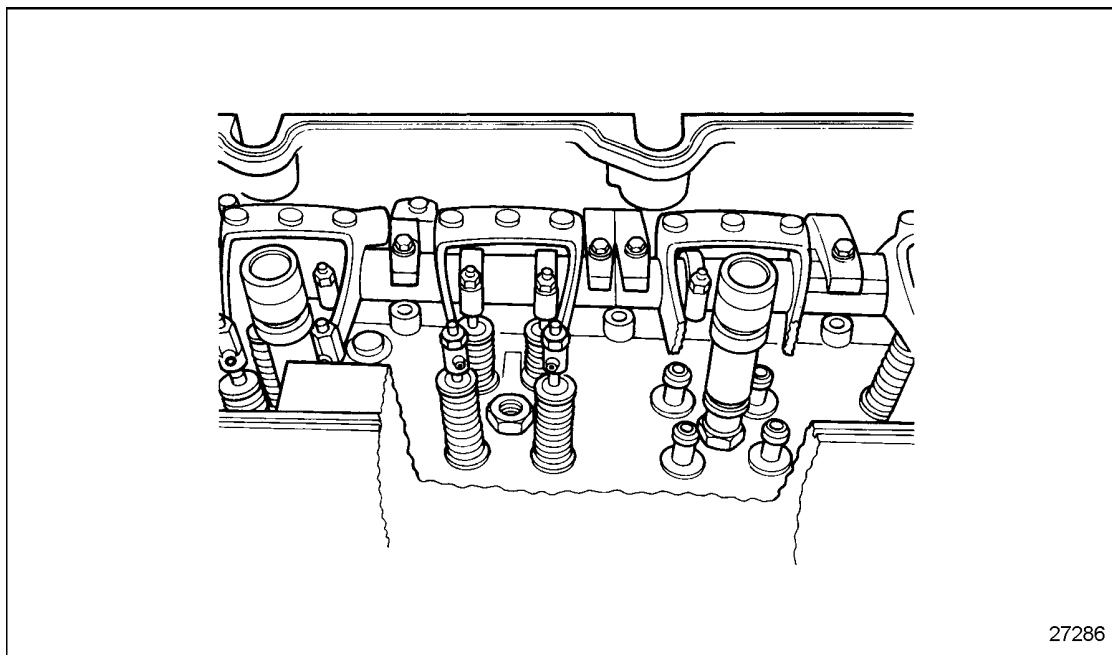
Valve and Fuel Injector Height Adjustment Components for the Series 50G Engine
